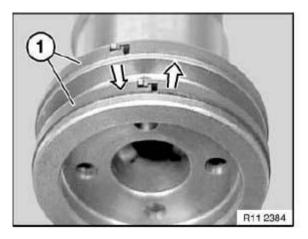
Identifying Inlet Camshaft And Compression Rings Courtesy of BMW OF NORTH AMERICA, INC.
